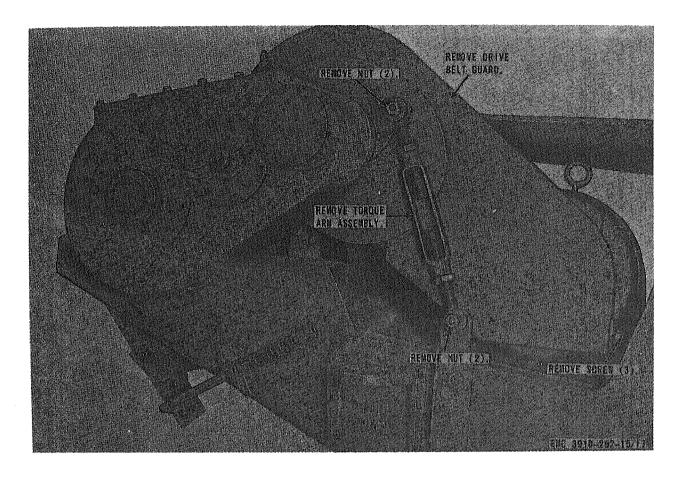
Torque arm assembly and drive belt guard removal and installation.
